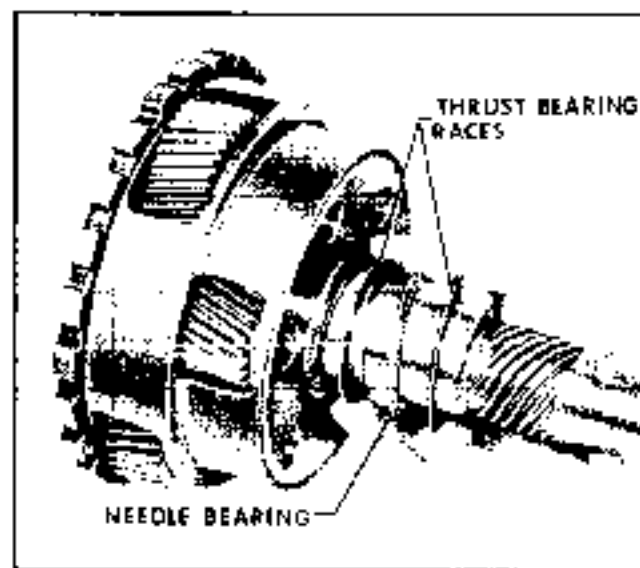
F-34 Removing Planet Carrier Thrust Bearing and Races
